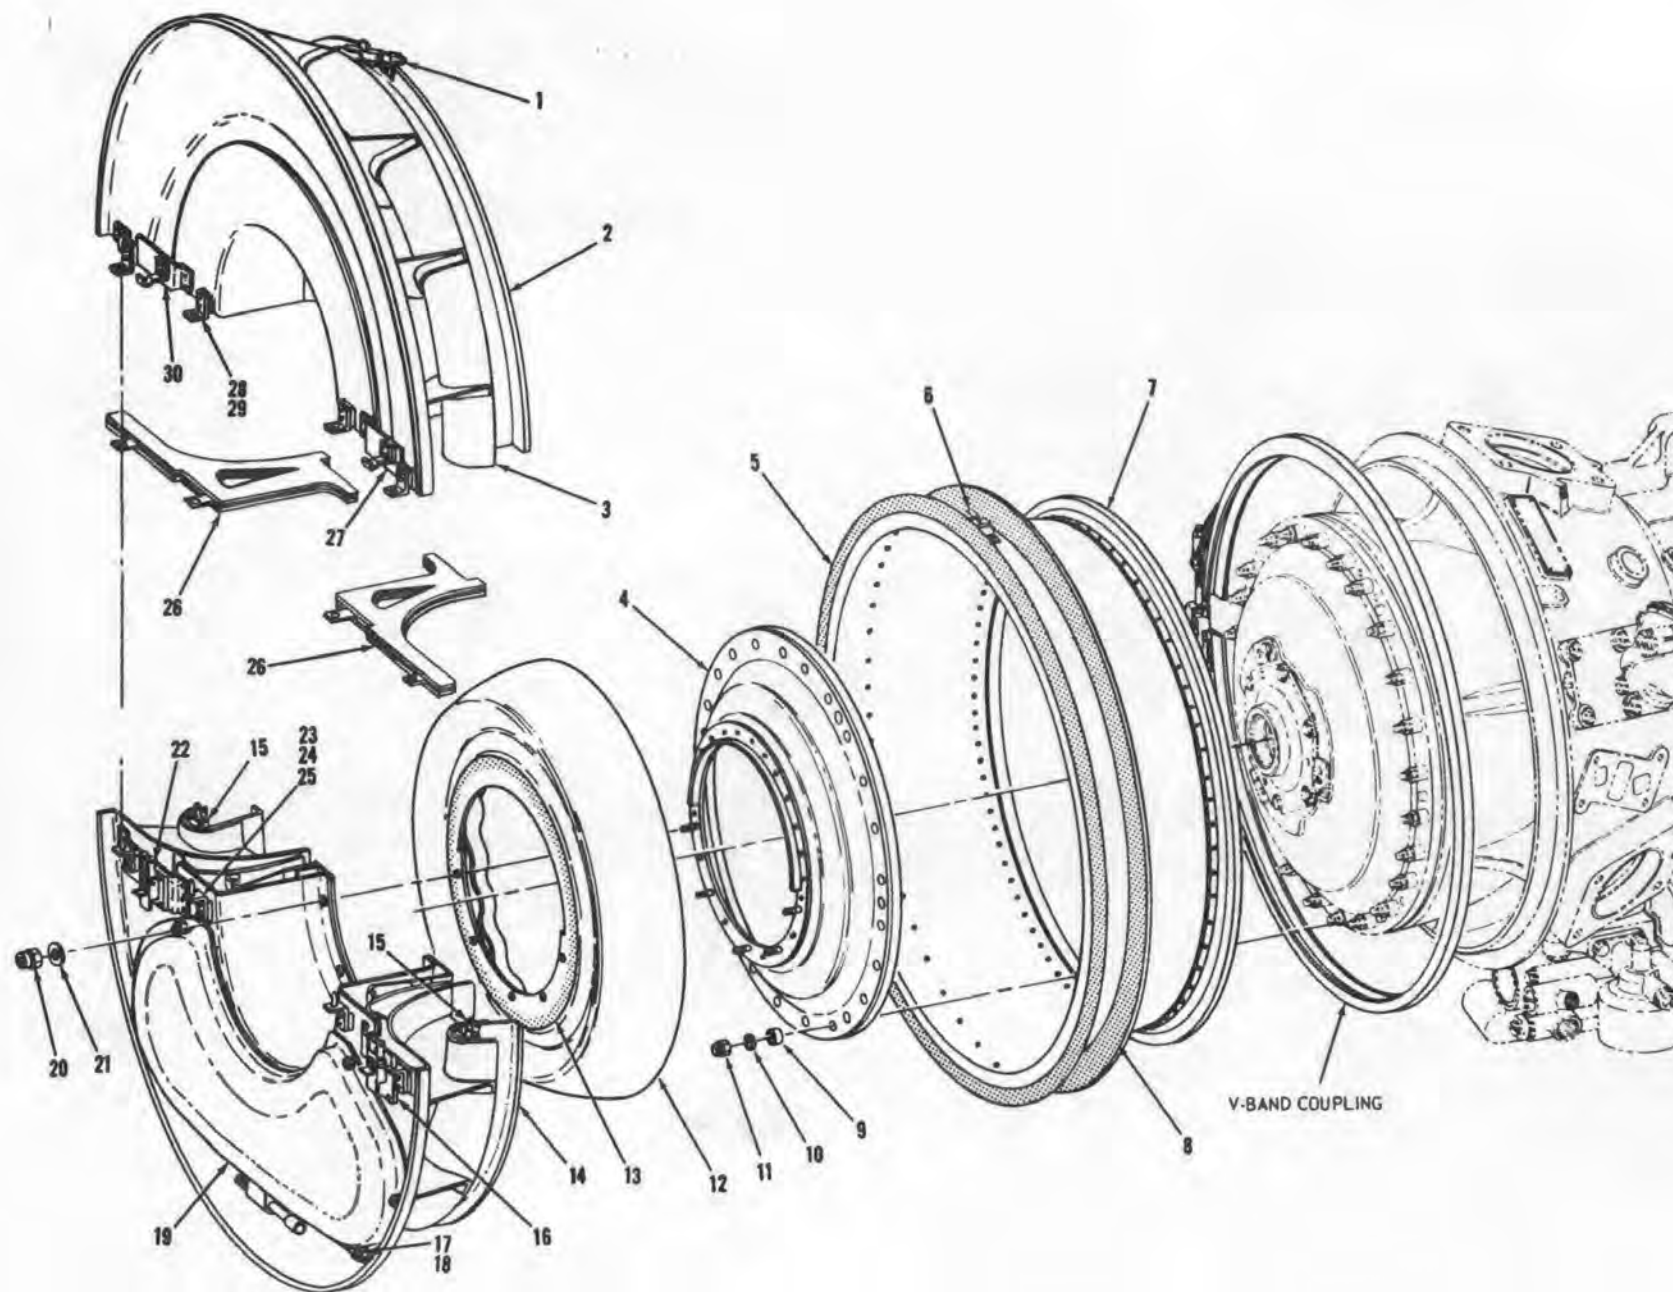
Sand and dust separator — exploded view (Sheet 1 of 2)
